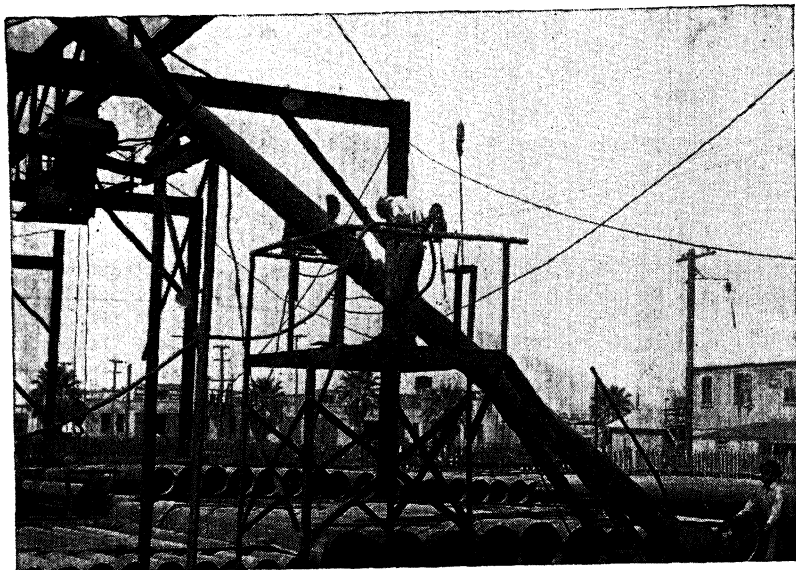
In a fabricating yard at Galveston, Texas. Joining two 16-ft. lengths of "Kaneweld" 24-inch surface casing. This casing is fabricated from rolled plate, welded longitudinally by the automatic carbon arc process. It is installed in the field in 32-ft. lengths with shielded arc mild steel electrodes.
